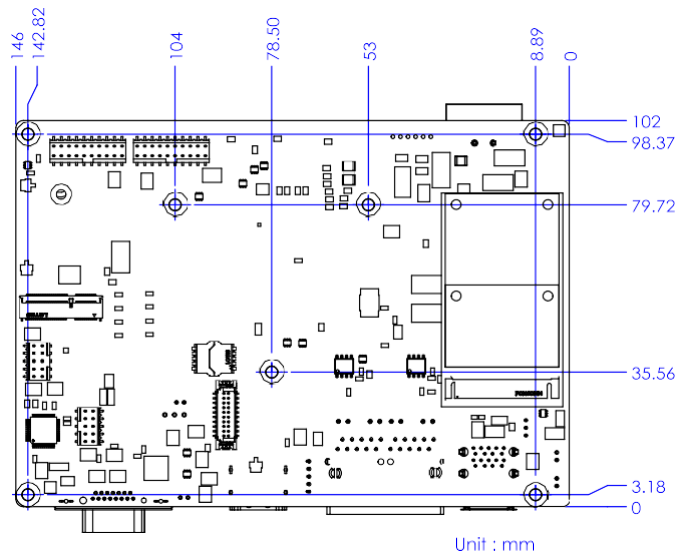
PCM-9366 Mechanical Drawing (Bottom Side)
